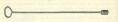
CLEANING ROD: For mixing metal deaner through the molten metal in the molting furnace: the periorated cup holds sufficient (deaner for 1000 pounds of metal.
